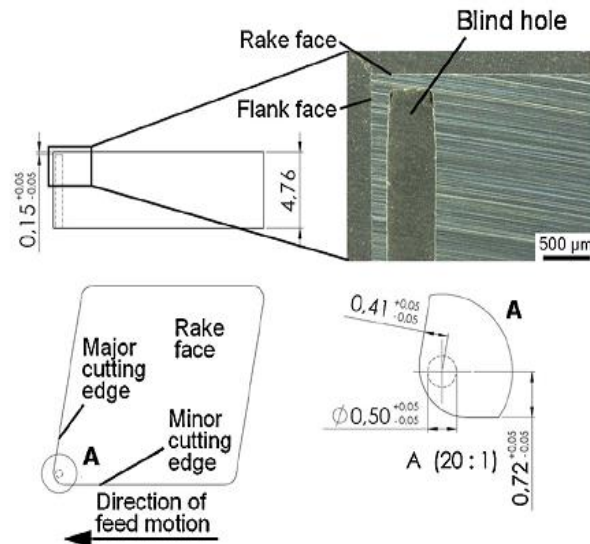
Position and dimensions of the hole practised to house a fibre-optic two-colour pyrometer to acquire the cutting temperature [37].
